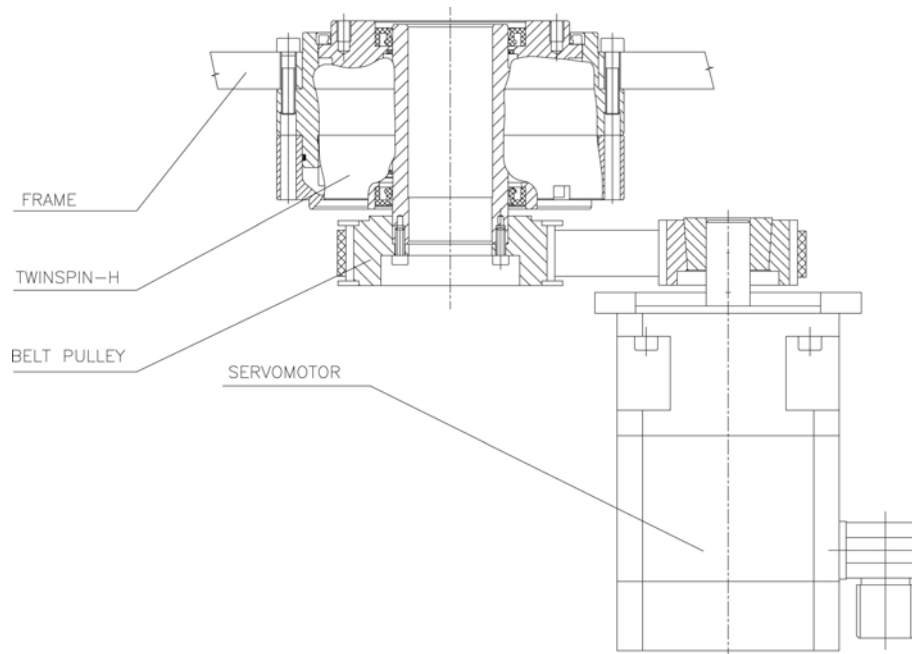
Connection of gear shaft with toothed belt by the screw joint
